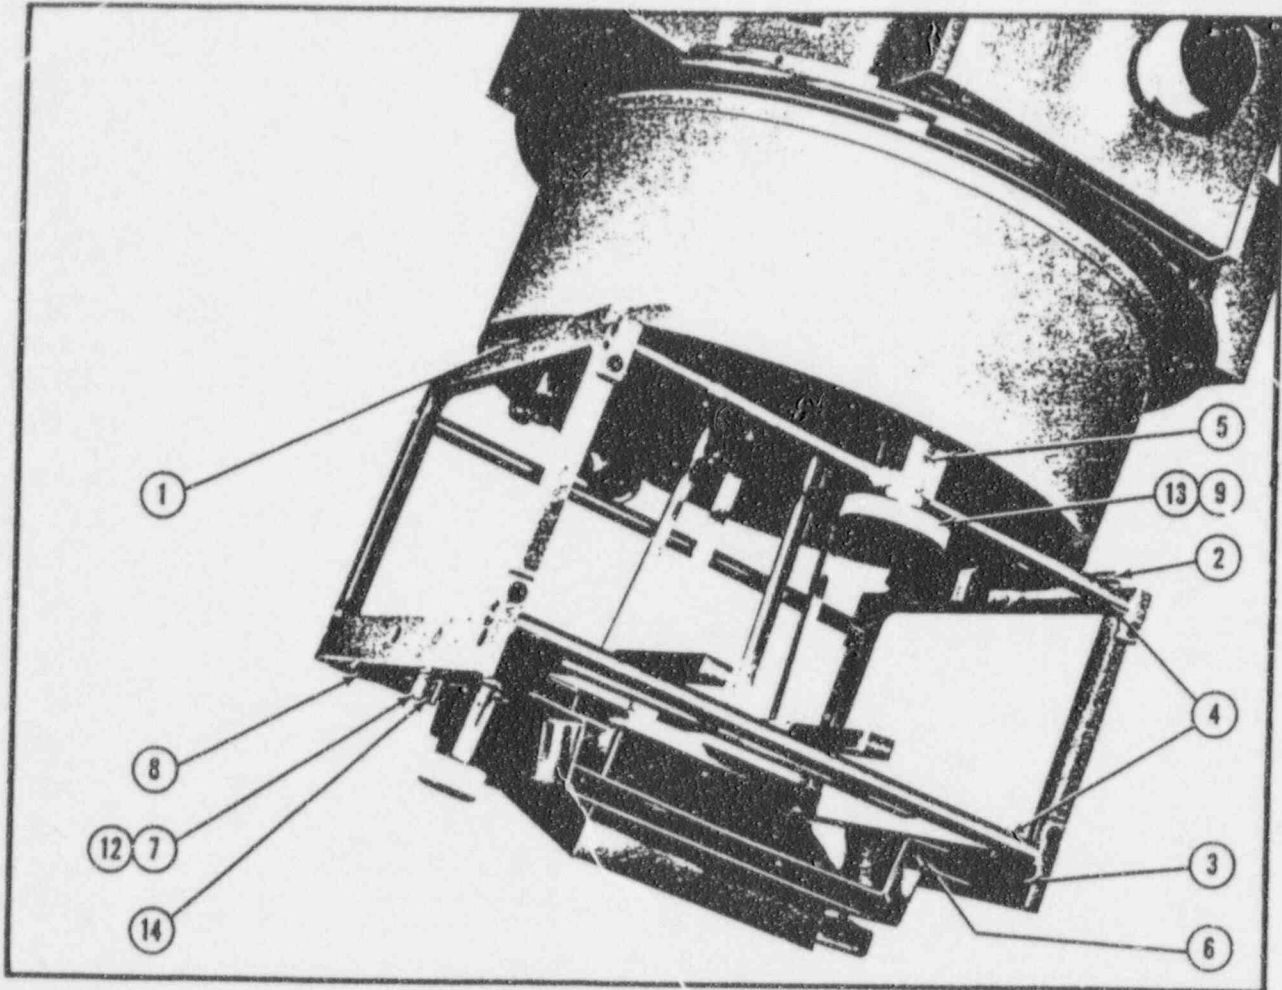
COBALT, SCALE POINTER MOUNTING ASSEMBLY
